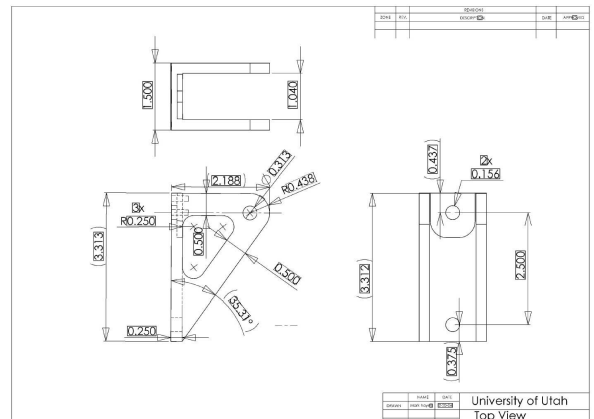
Results of dimension interpretation. The dimensions extracted are outlined with boxes.
